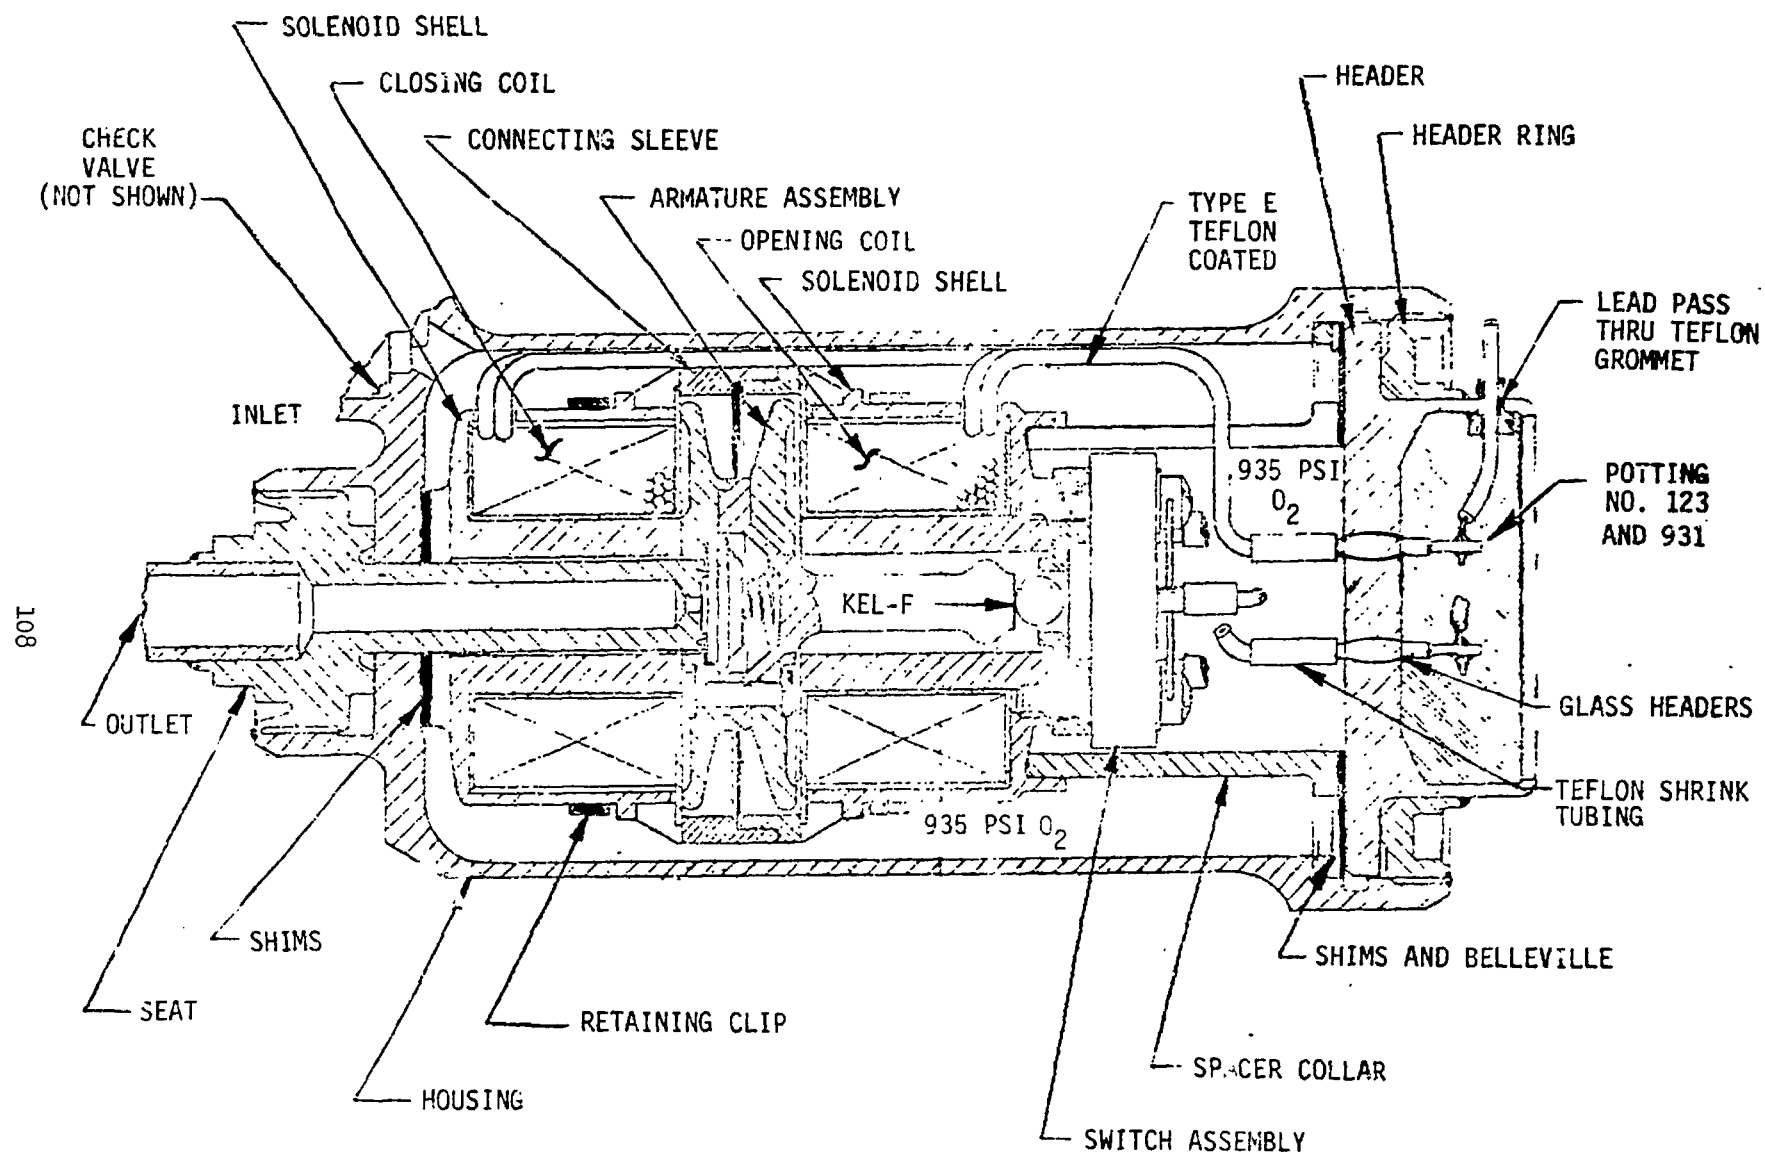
FUEL CELL VALVE MODULE SOLENOID VALVE.
